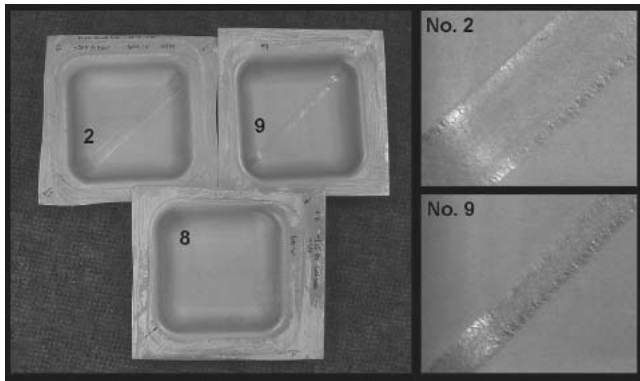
Formed test parts showing areas of large grains in material cold worked prior to forming
